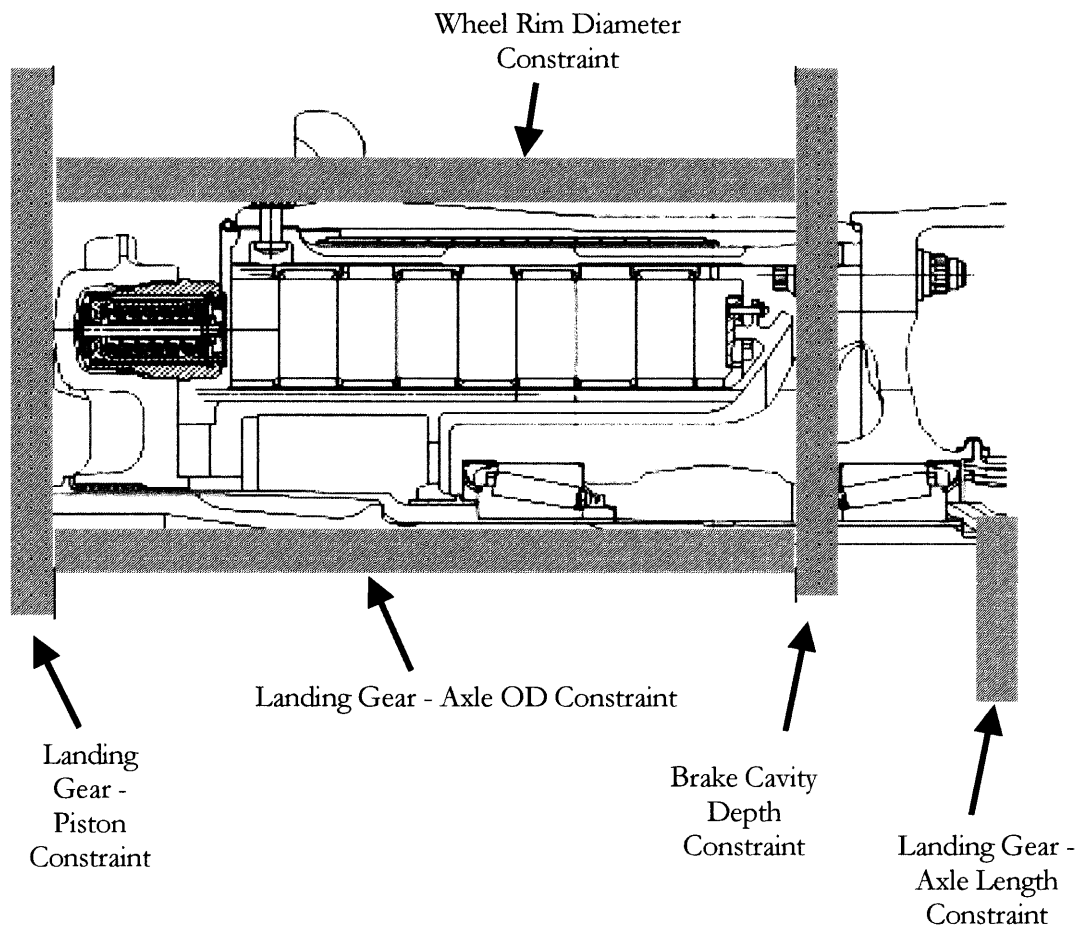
Aircraft Installation Constraints on Wheel & Brake Design (Dunlop)
